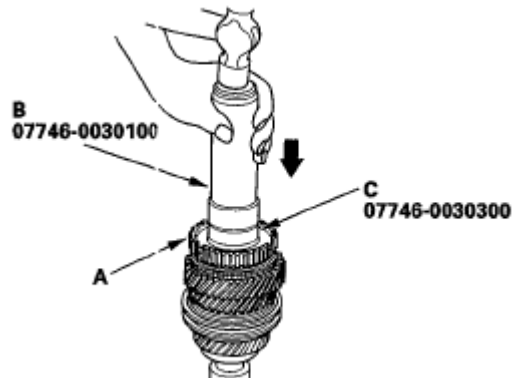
Identifying 5th/6th Synchro Hub, I.D. Driver And I.D. Attachment
